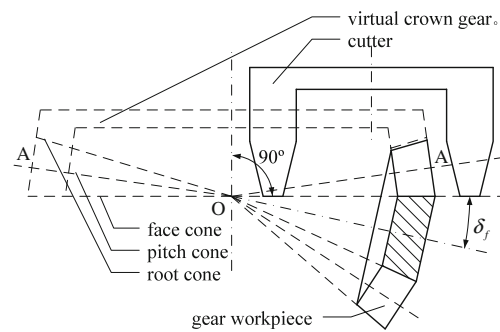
Cutter, virtual crown gear, and generated gear workpiece
